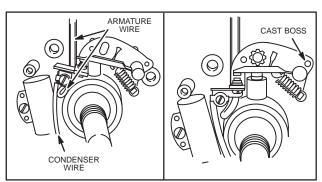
ADJUSTING STYLE II BREAKER POINTS
